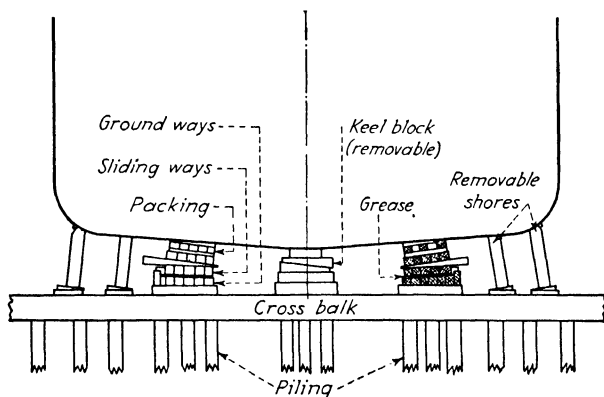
Section through ship and ways showing the system of piling and hull support prior to launching.
